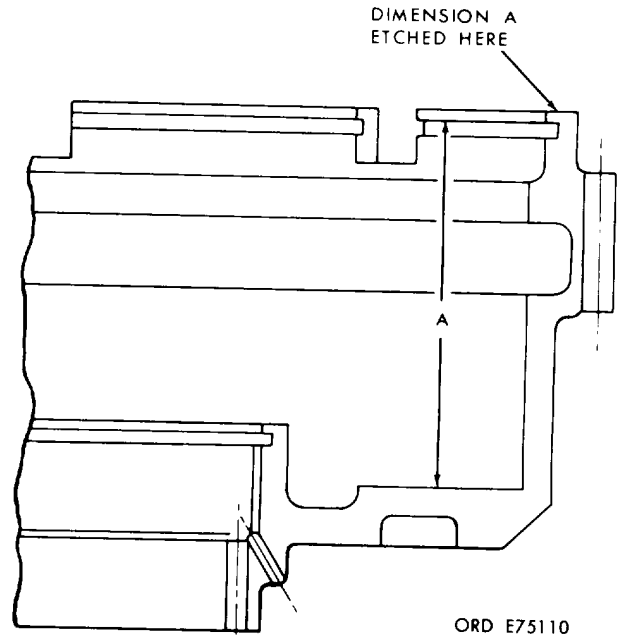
Dimension from clutch reaction surface of housing to snapping groove
